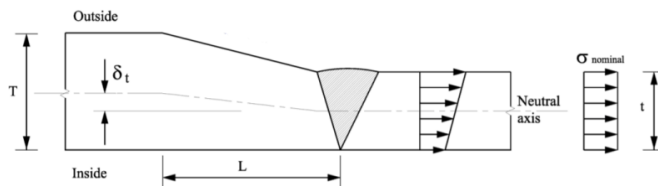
Transition in thickness at butt weld in tubular when welding only from the outside (DNV-C203 (2016)).
